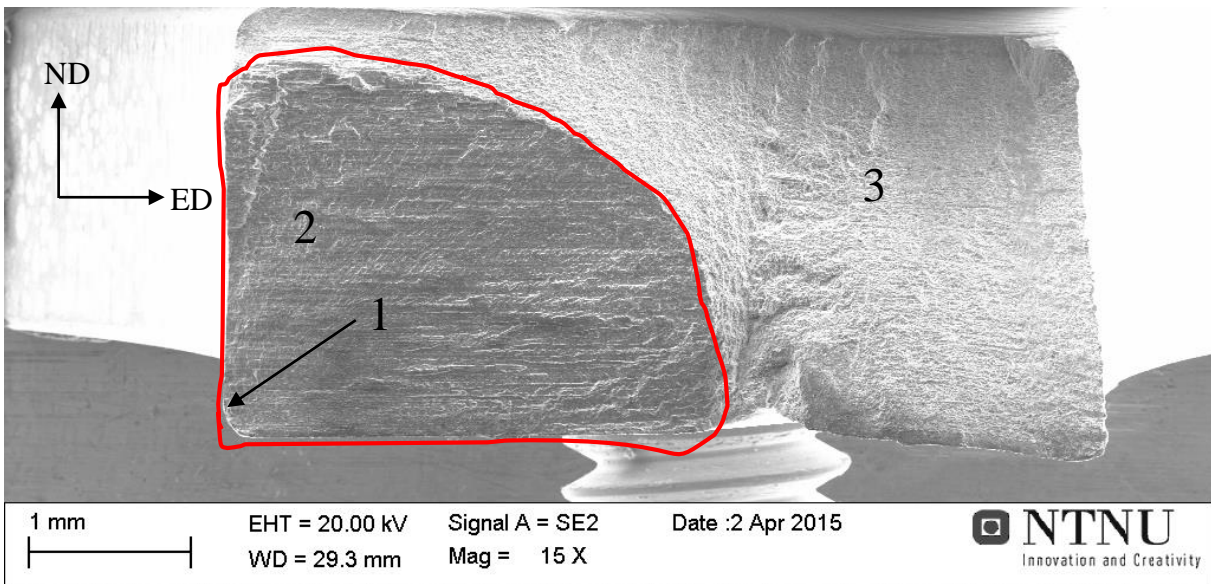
An overview of the fractured surface of AA7108 T6 with the longest fatigue life, 15X magnification. The fatigue fractured area is enclosed by the red line.
